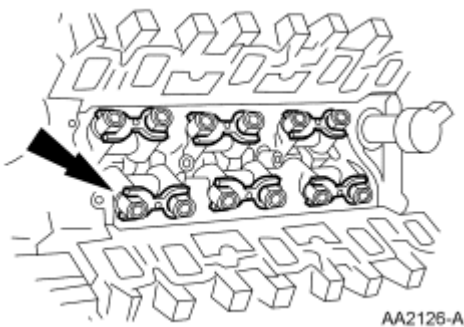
Locating Hydraulic Lash Adjuster Guide Plates
